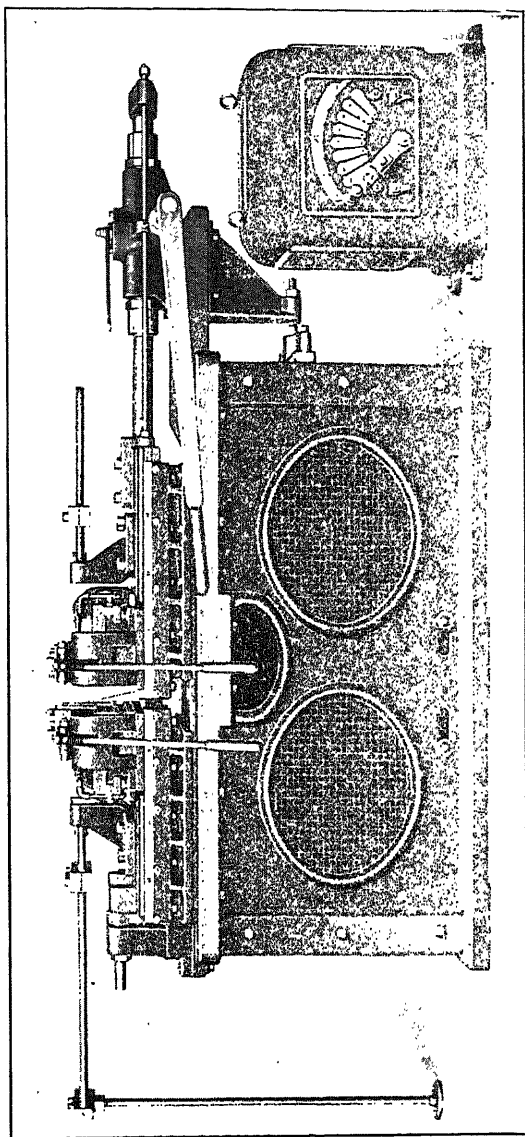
No. 9 Butt-Welding Machine.
